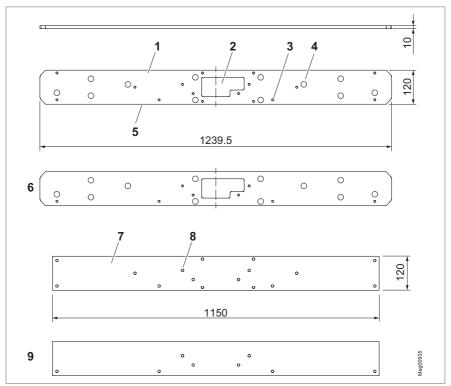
Base plate and drilling template mTripod FMTP-ML (dimensions in mm)
